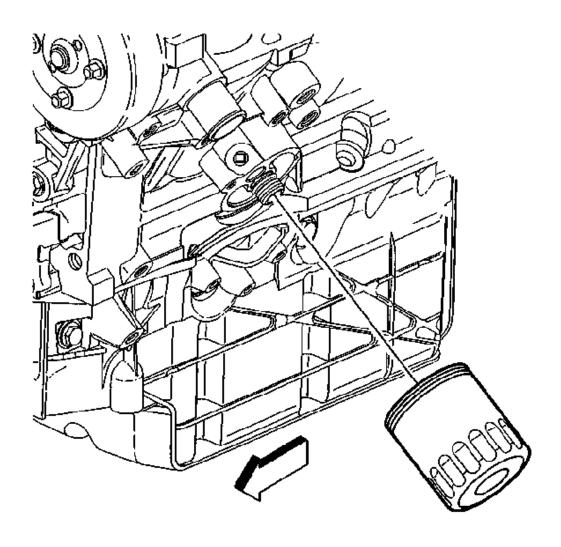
Removing/Installing Oil Filter Courtesy of GENERAL MOTORS CORP.
